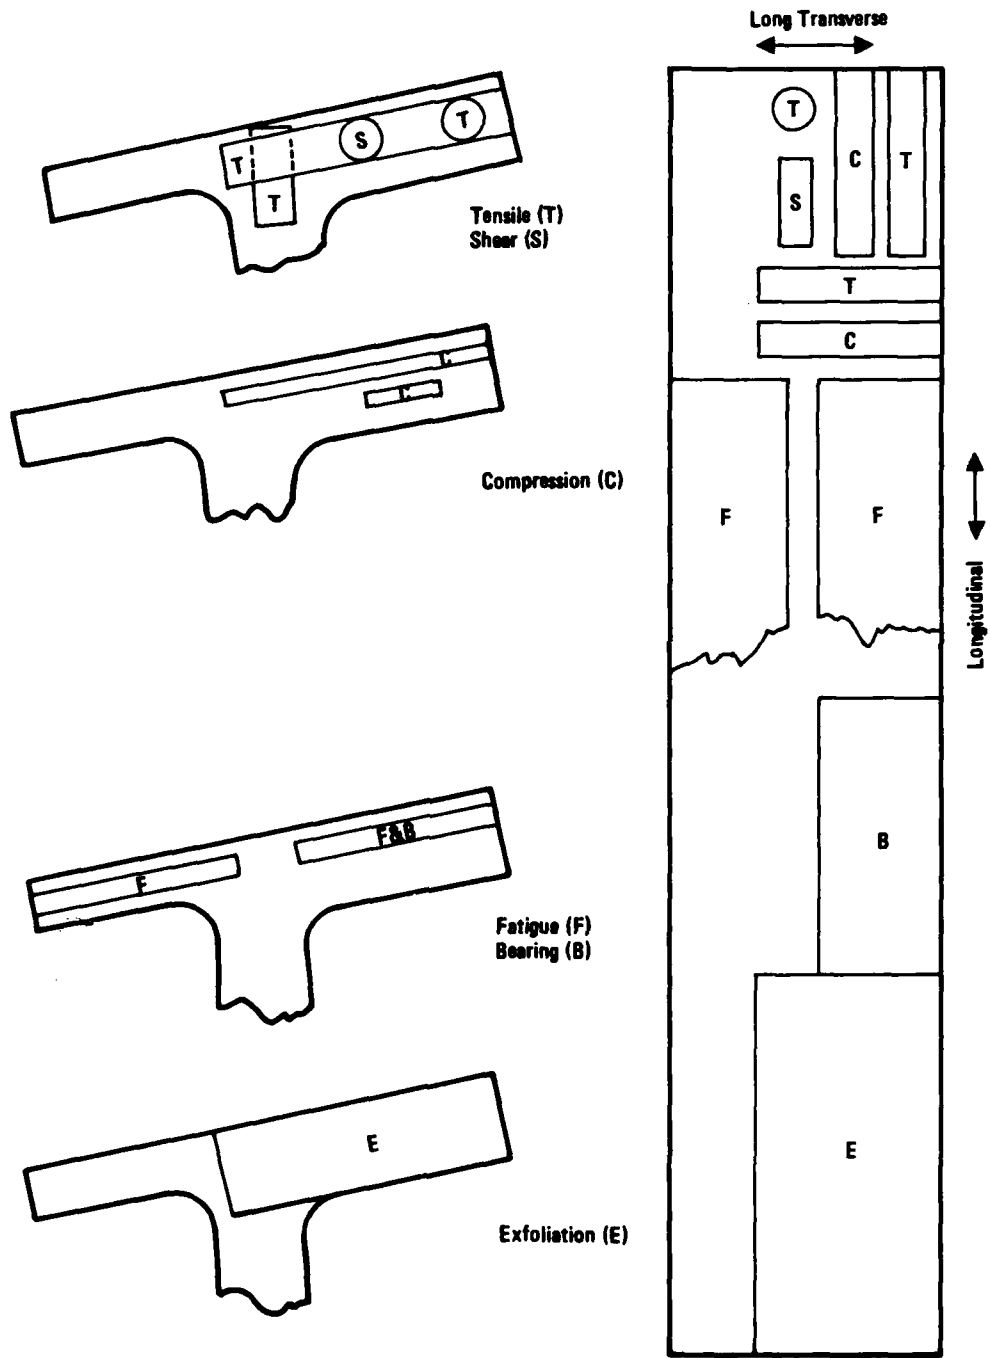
Schematic of test specimen layout for wing spar cap, LS 9788. (Not to scale)
